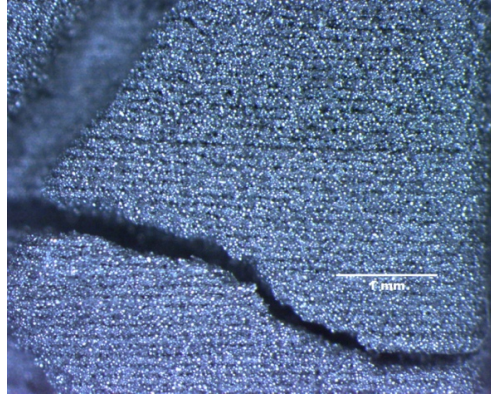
Microscopic view of the Crack formed on the test specimen
